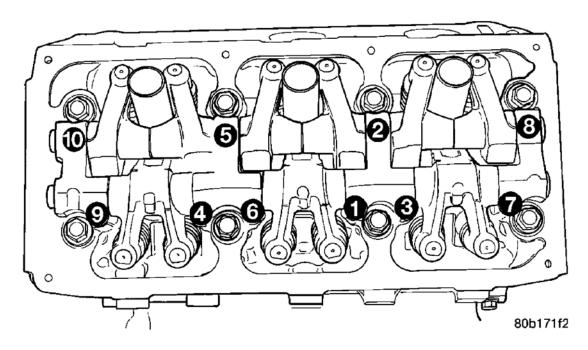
Rocker Arm/Shaft Assembly Bolts Tightening Sequence Courtesy of CHRYSLER LLC
